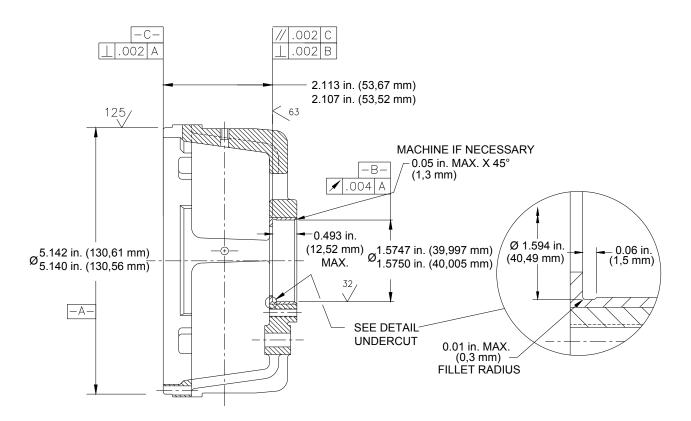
Anti-Drive End End Bell Bearing Liner Machining Specifications (IPL 10002, P/N 23032-3665)
